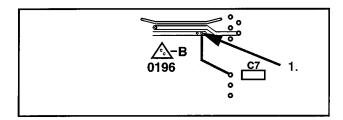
CL-GD7555 Power Supply Module for Demonstration Board (Solder Side)
